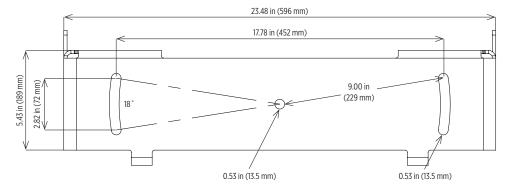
Dimensions for Standard Mounting Brackets
